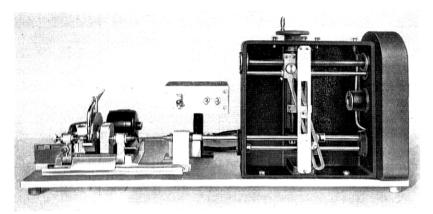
A typical variable pitch helixing machine with cover removed to show pitch-changing mechanism.
